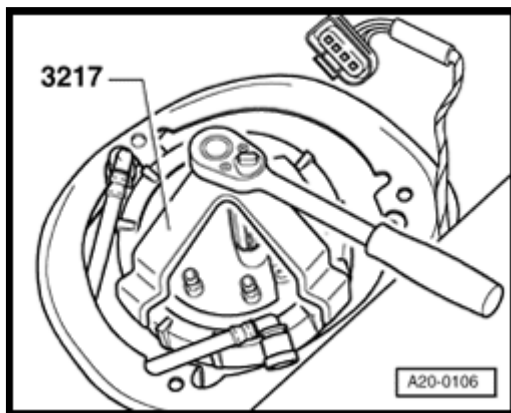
Removing/Installing Union Nut With Wrench 3217
